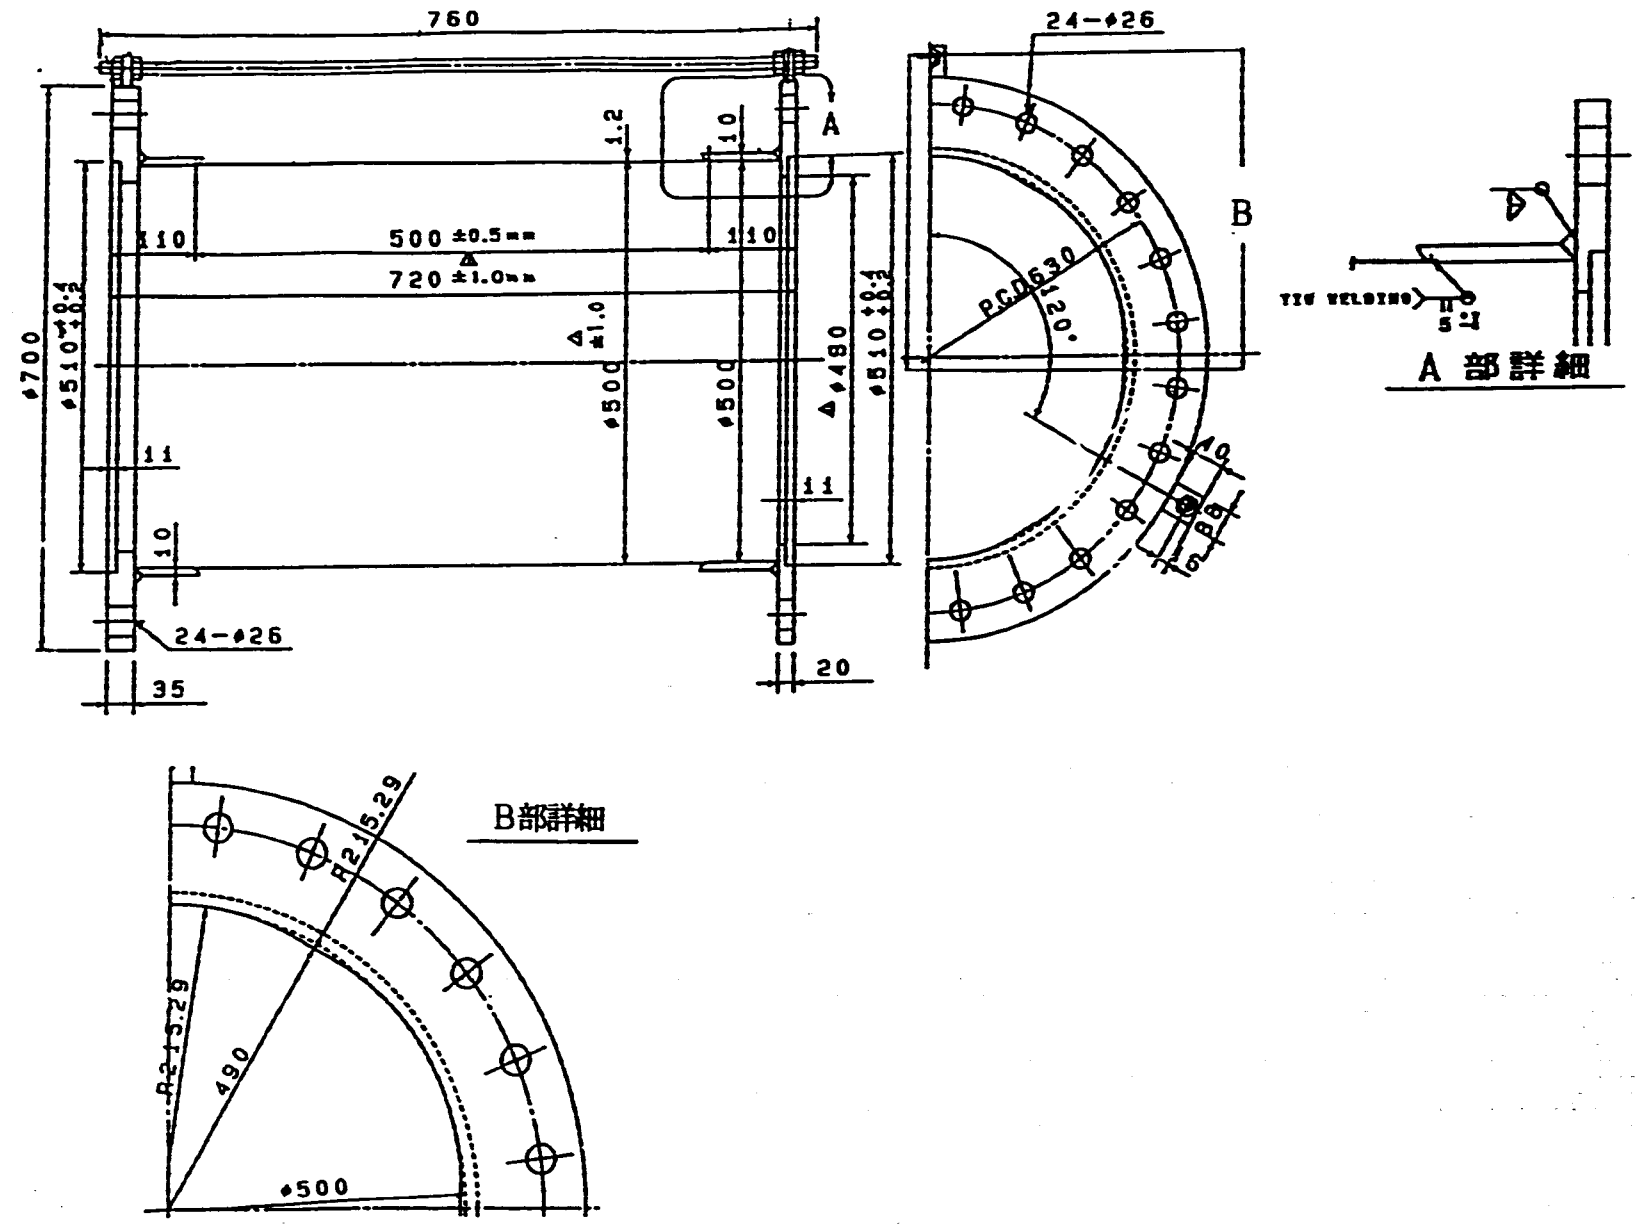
(3) Geometry and dimension of cylindrical test piece(CB500-1.2-01H).
